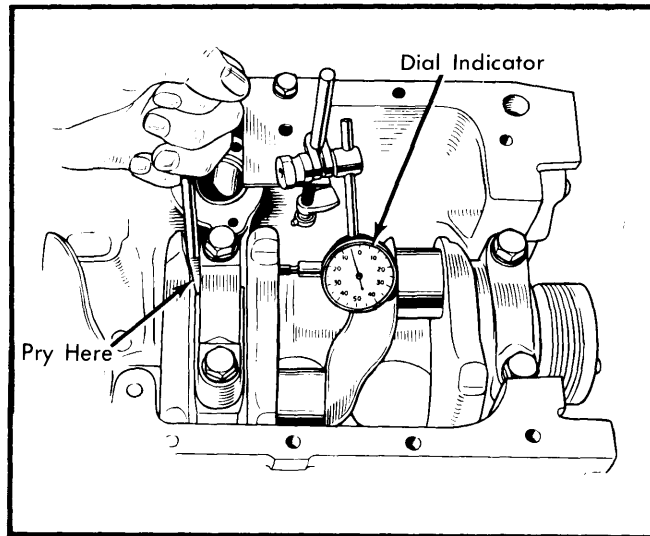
Using Dial Indicator to Check Crankshaft End Play
